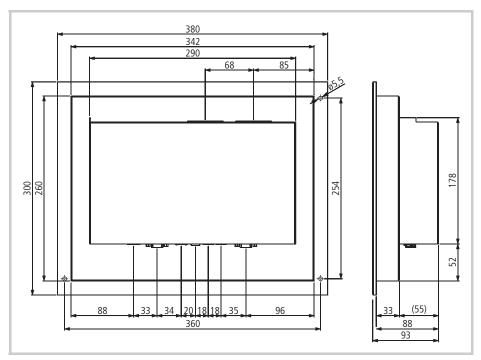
Mechanical dimensions of the 12.1" devices with 4-hole front in mm
